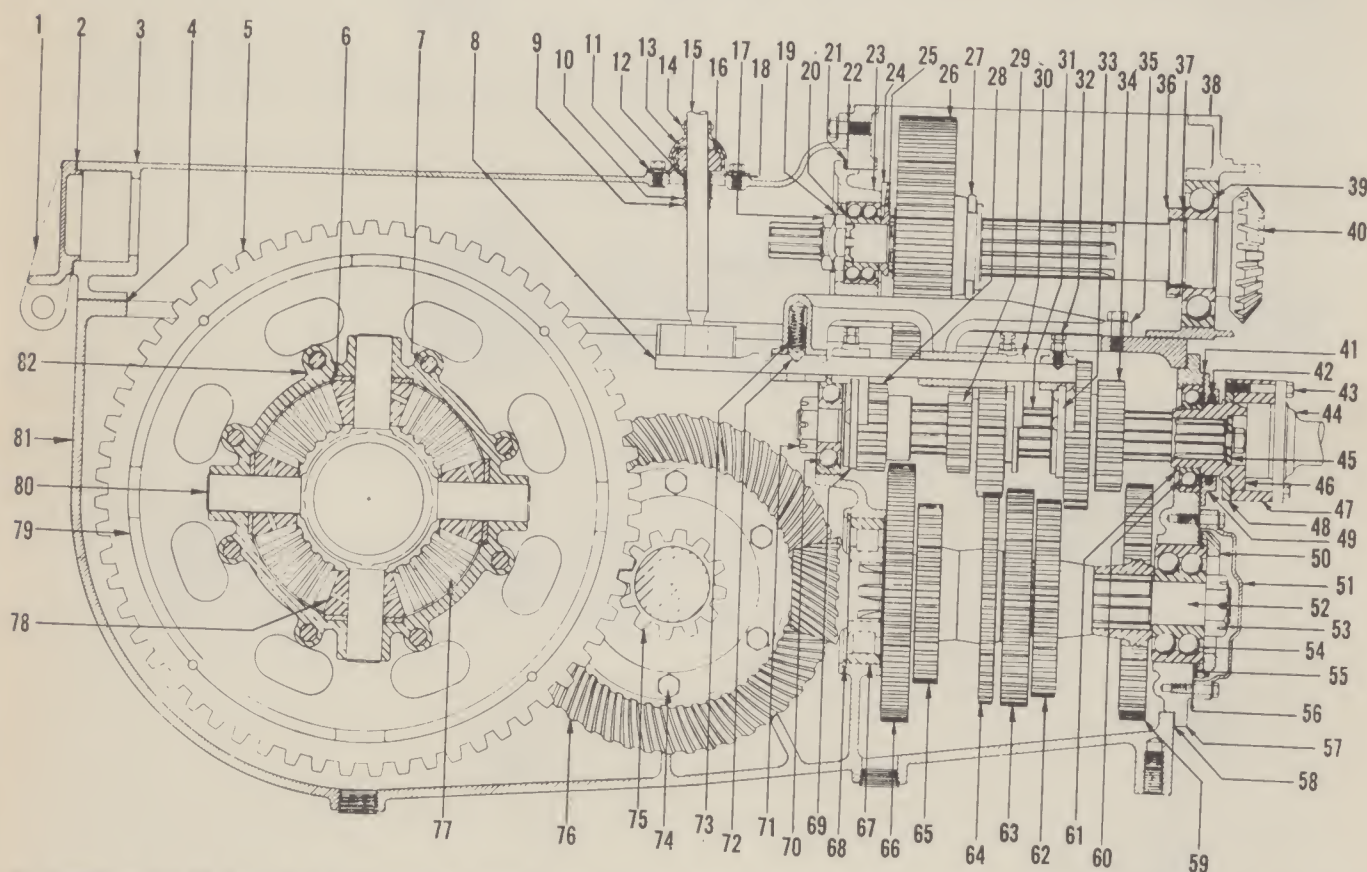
Series 99 four speed transmission. Super 99 six cylinder 4 speed unit has chain type coupling retained by clamp bolt but is otherwise the same. Bevel drive pinion and shaft sold separately or as a set with matching bevel ring gear. Shims (55) control position of bevel pinion gear. Correct backlash is etched on bevel ring gear.
